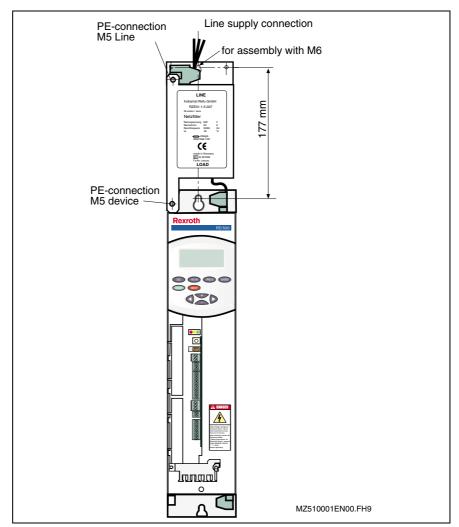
Assembly example for RZE01.2 / RZE02.1
